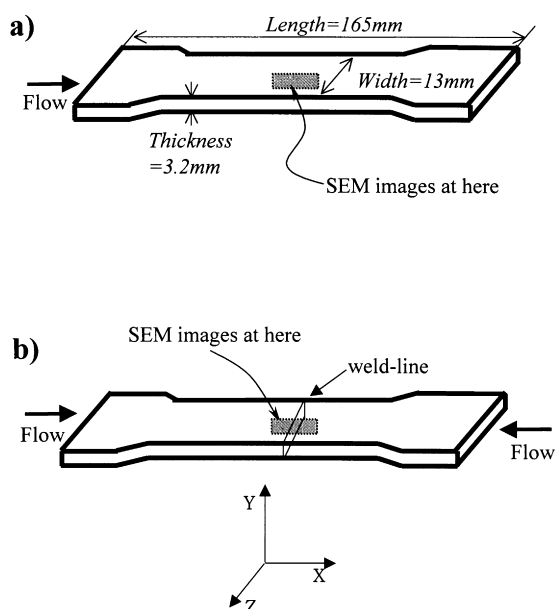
Schematic of the mold cavity where molten polymers enter the cavity through a film gate: (a) mold dimension without weld-line; and (b) mold dimension with weld-line.
